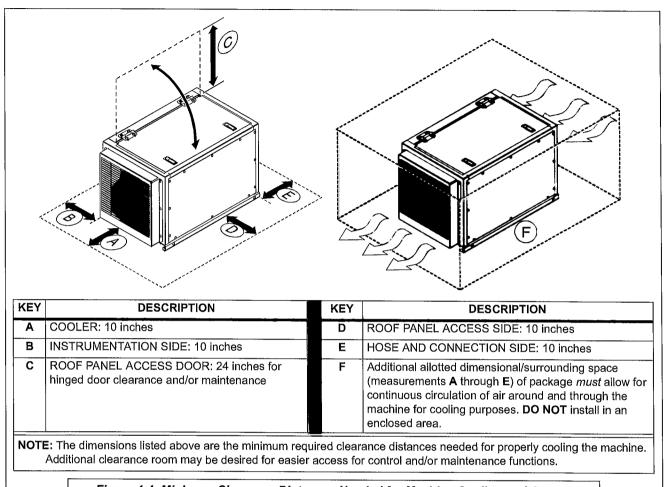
Minimum Clearance Distances Needed for Machine Cooling and Access
